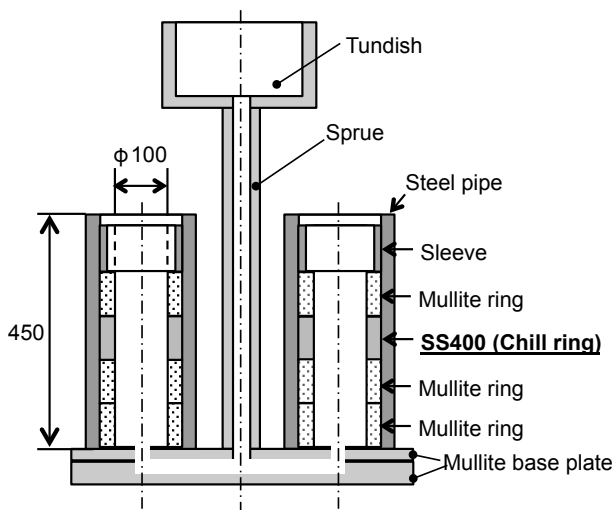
Schematic drawing of modified Sato mold and bottom pouring casting.
